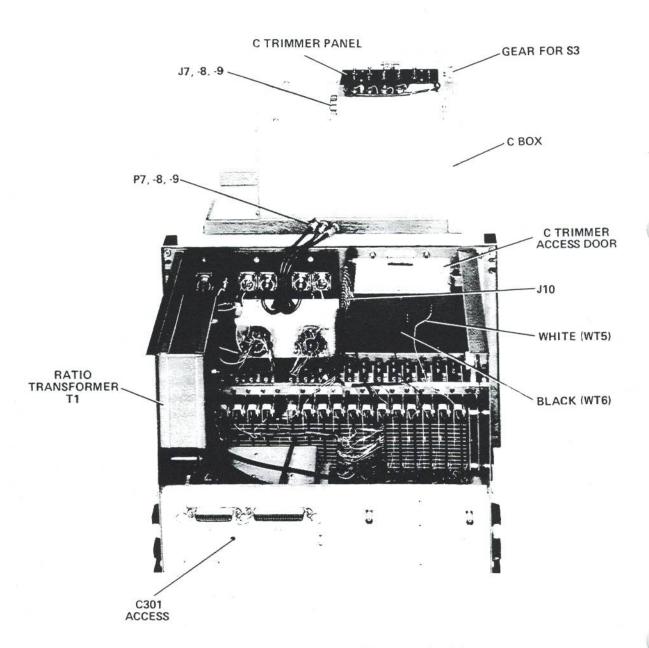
Interior view, upper rear, with the C box removed and shown above.
